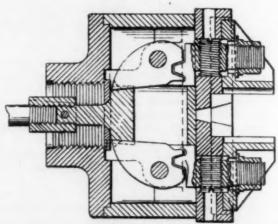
SECTIONAL VIEW OF CHUCK, SHOWING JAWS CLOSED.
